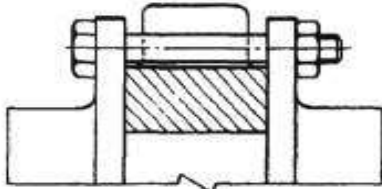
Butterfly Valve, Flangeless Wafer Type
